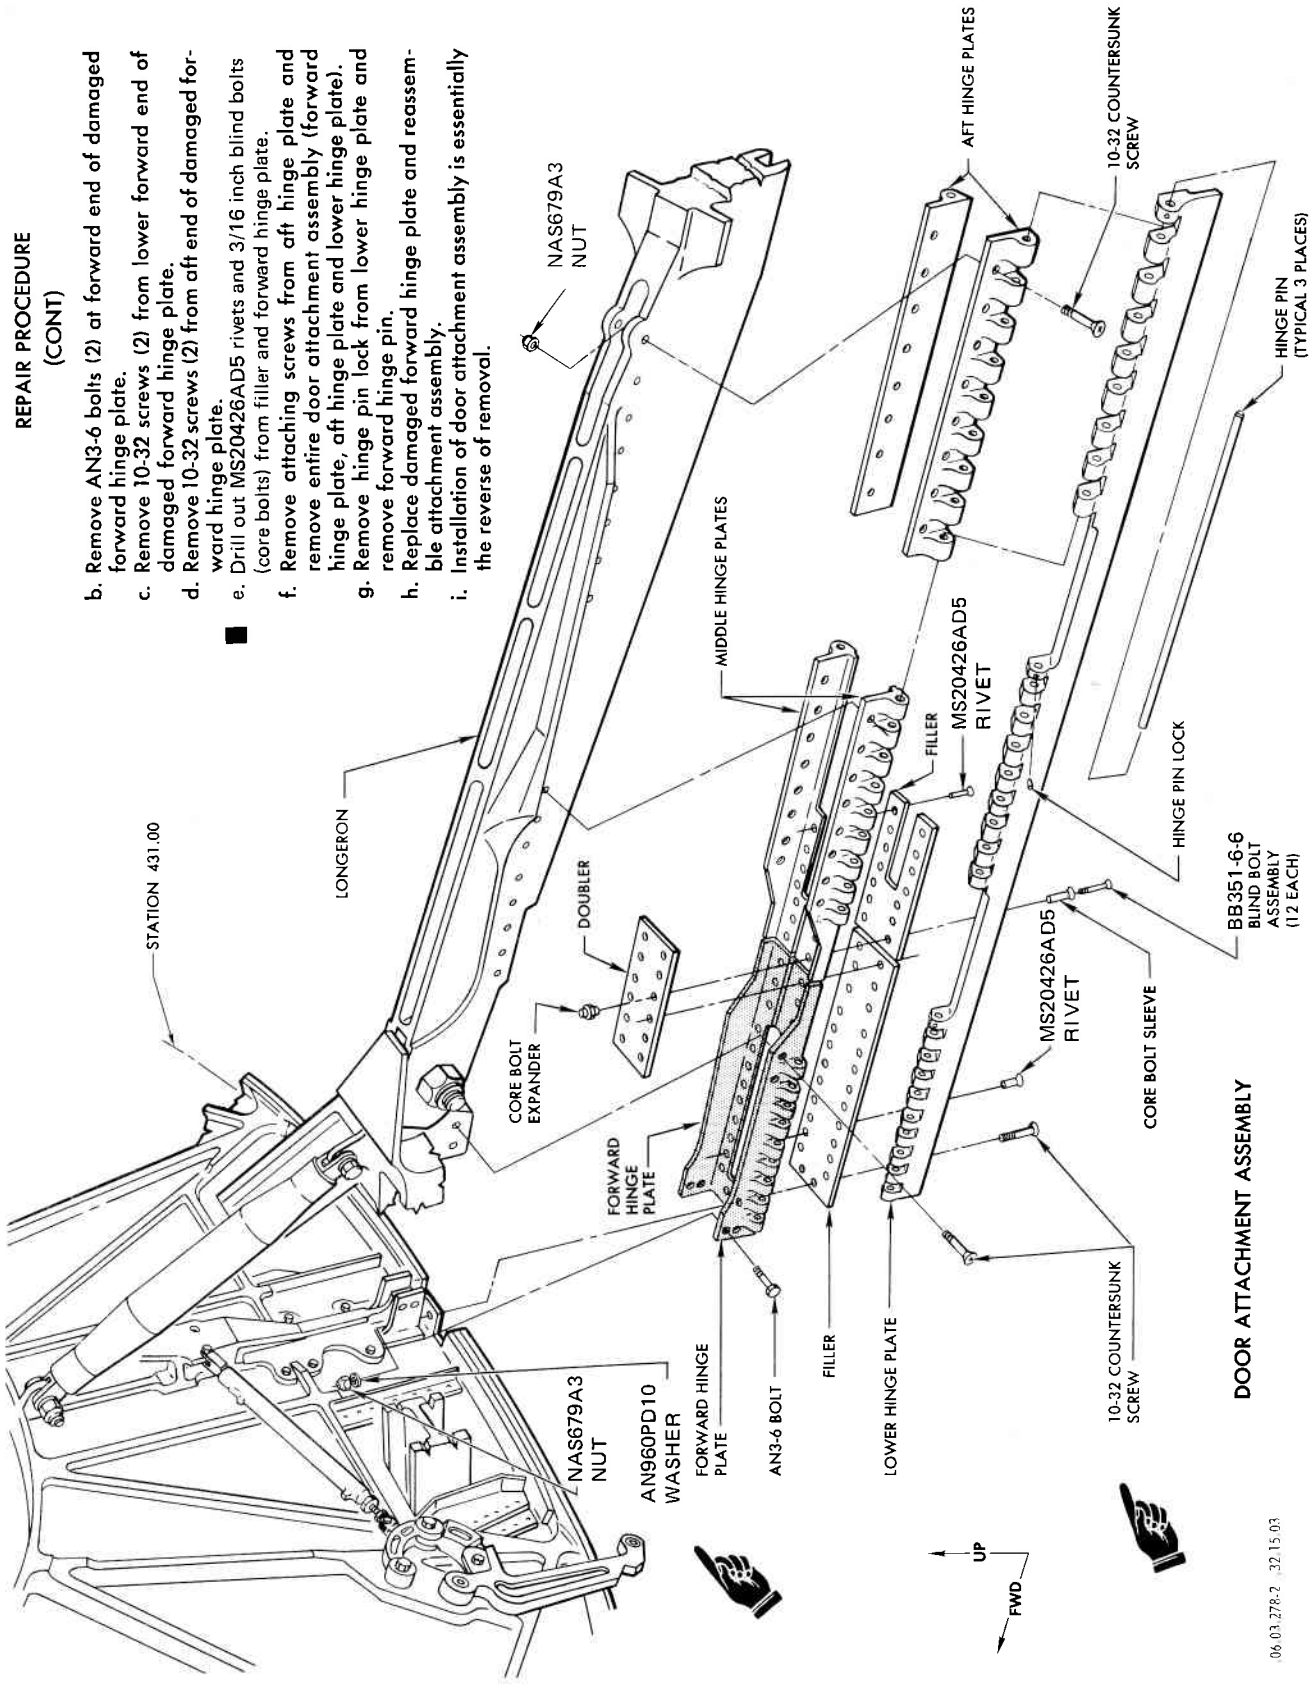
Main Landing Gear Door Attachment Repair (Sheet 2 of 2)
